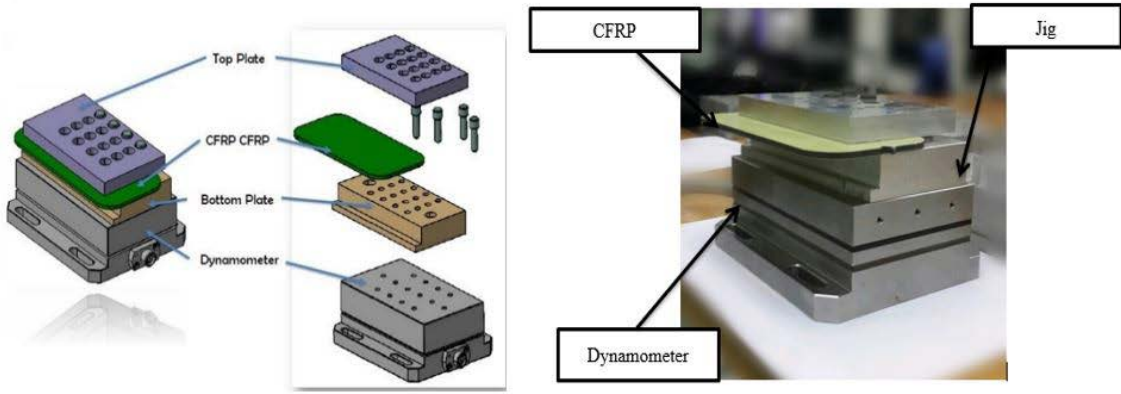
(a) to (left) CAD view of the jig with CFRP plate, (b) to (right) final fixture assembly preparation
